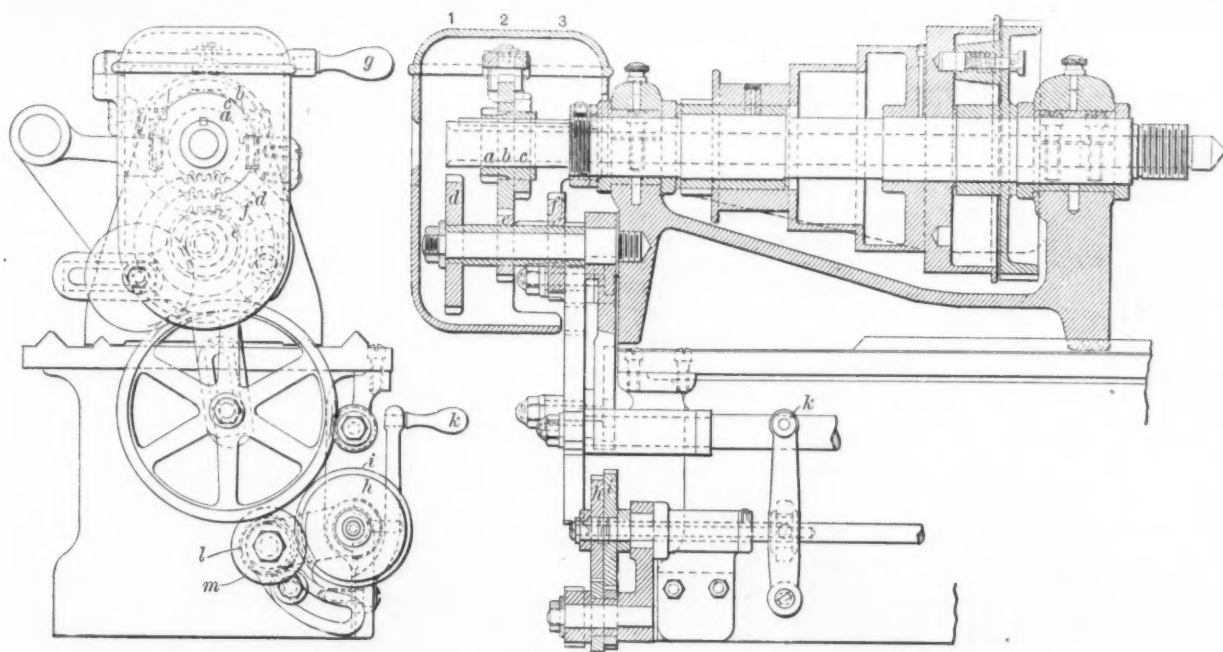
Details of the Quick Change Feed Mechanism of the Walcott Lathe.
